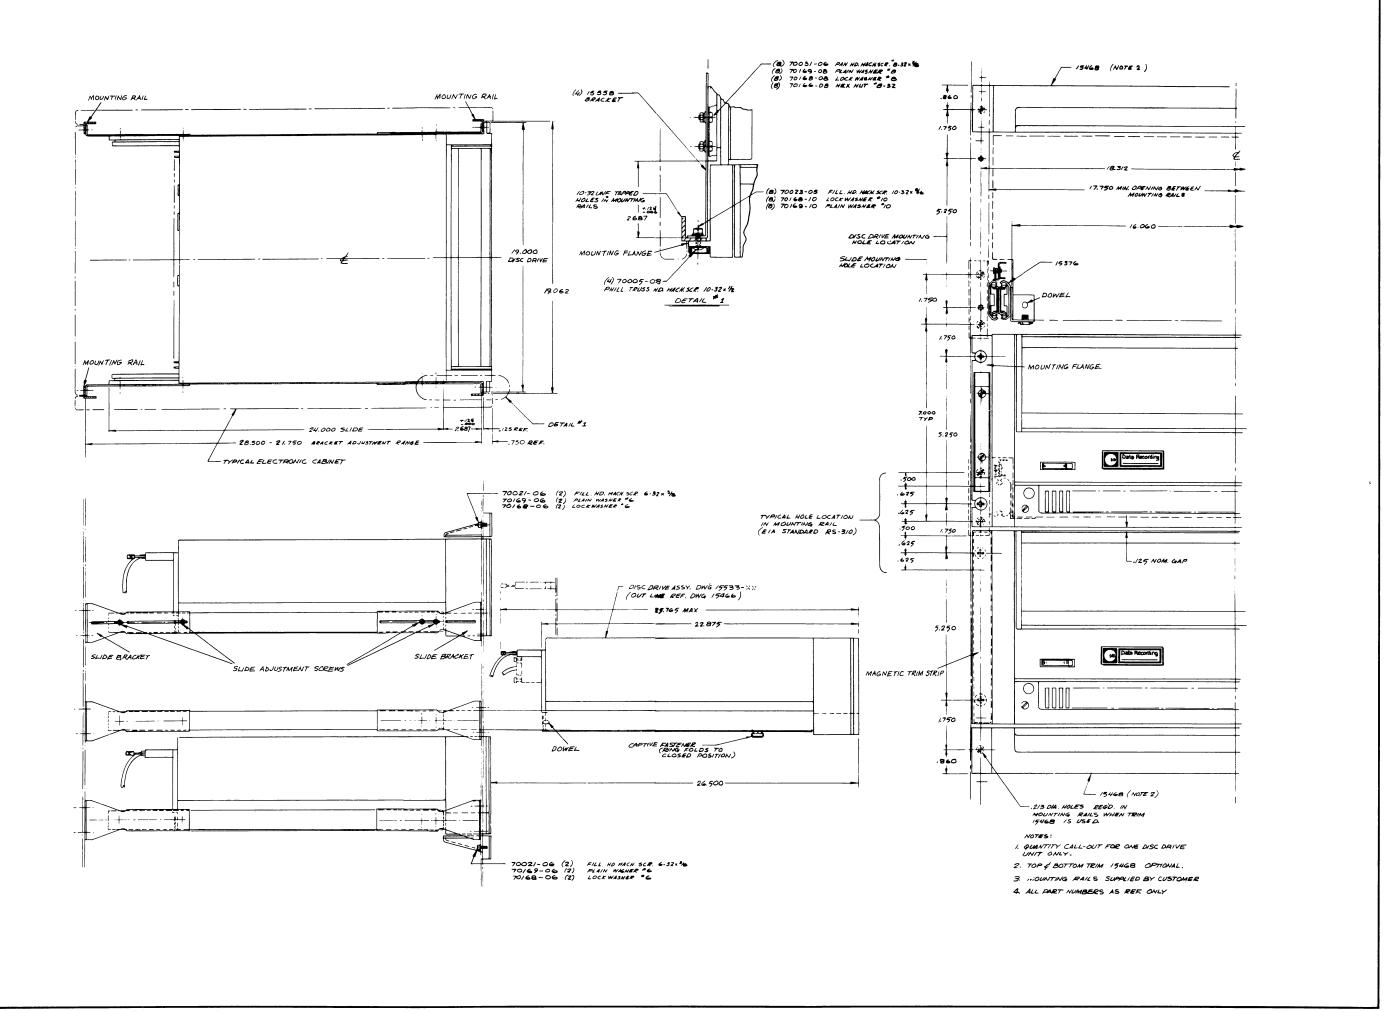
FLUSH-FRONT RACK MOUNTING
